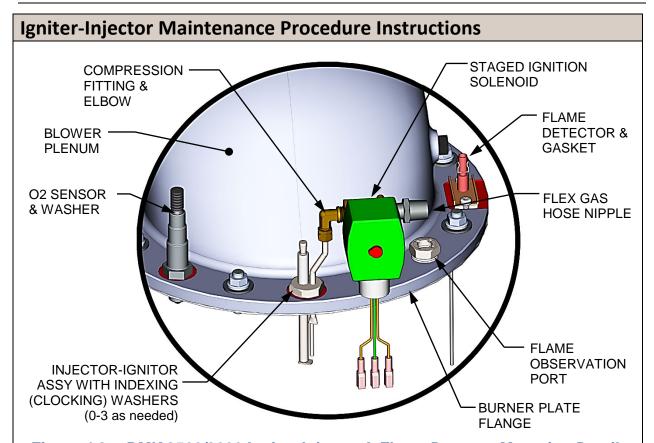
BMK 2500/3000 Igniter-Injector & Flame Detector Mounting Details
